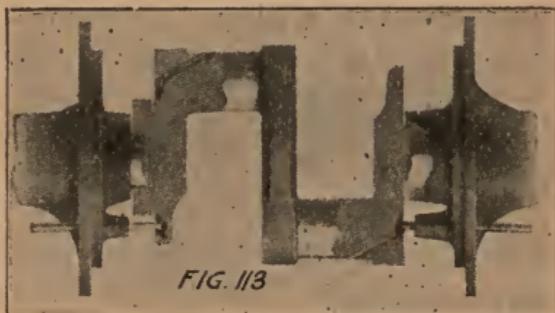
Crank shaft, showing how the oil is carried to the bearings on Leader tractor engine.
